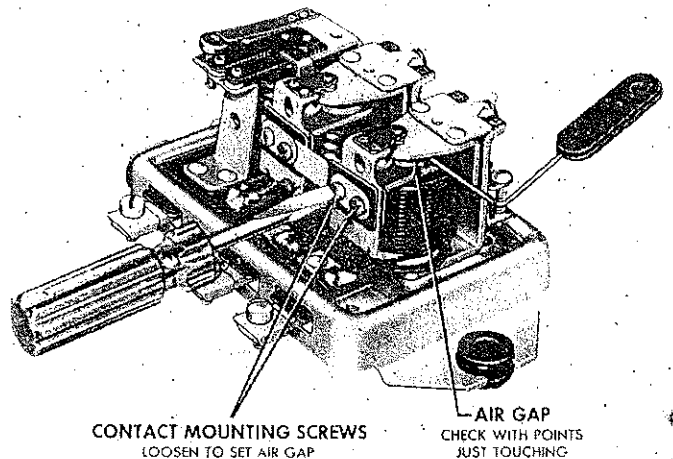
Adjusting voltage regulator armature air gap on Delco-Remy single core regulators with screw adjustment
